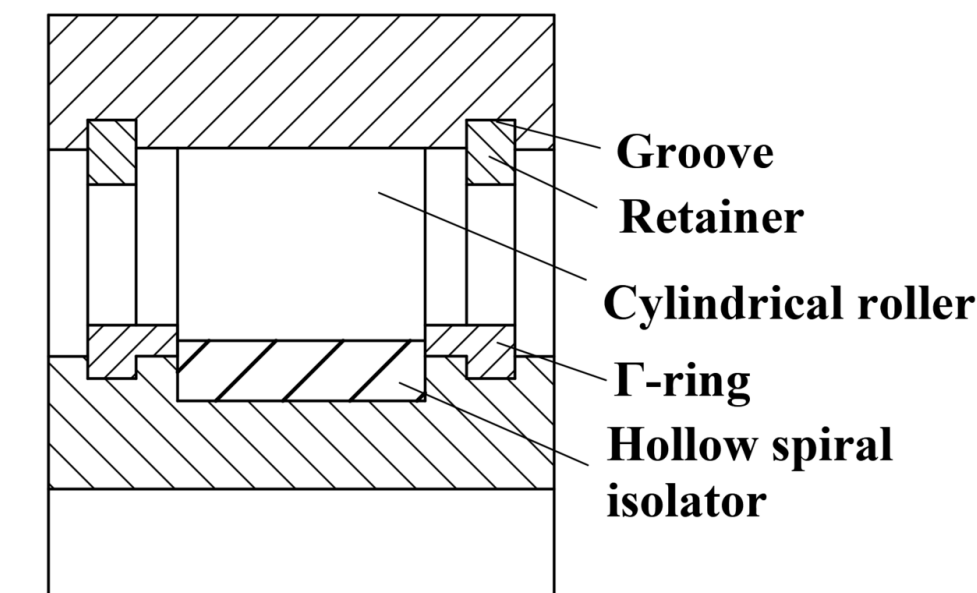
Hollow spiral isolator holder-free cylindrical roller bearing CN214661506U.
